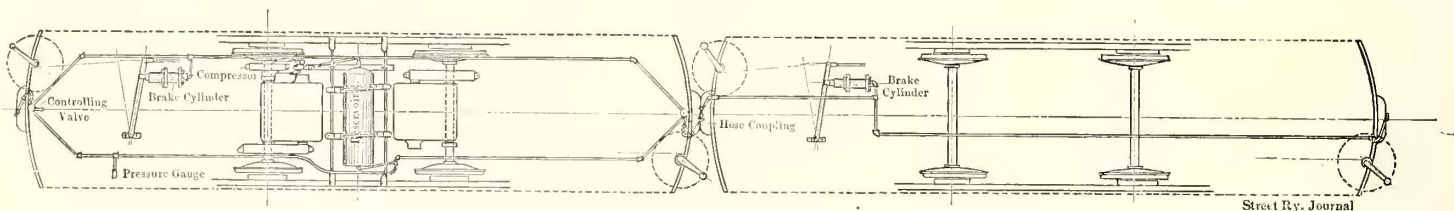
AIR BRAKE EQUIPMENT FOR MOTOR AND TRAIL CAR.
